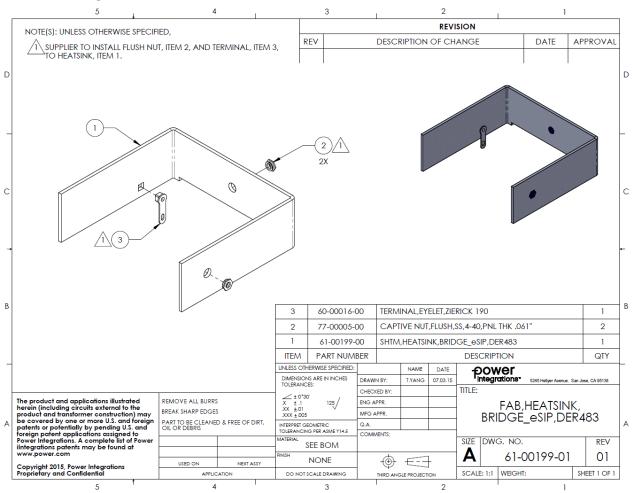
Primary Heat Sink Sheet Metal Drawing.
